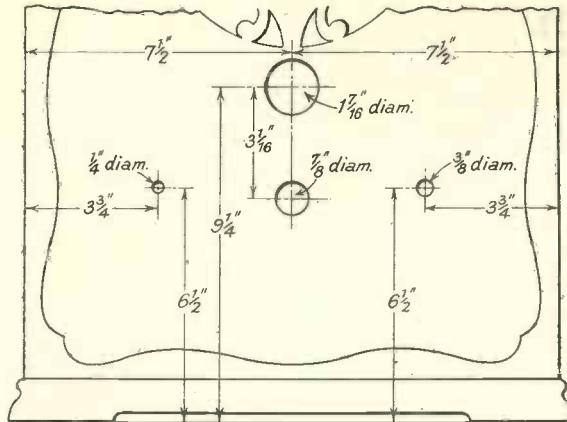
DRILLING DETAILS FOR CABINET FRONT.
